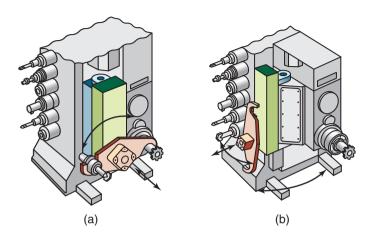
Swing-around tool changer on a horizontal-spindle machining center. (a) The tool-exchange arm is placing a toolholder, with a cutting tool, into the machine spindle. Note the axial and rotational movements of the arm. (b) The arm is returning to its home position. Note its rotation along a vertical axis after placing the tool, and the two degrees of freedom in its home position.
